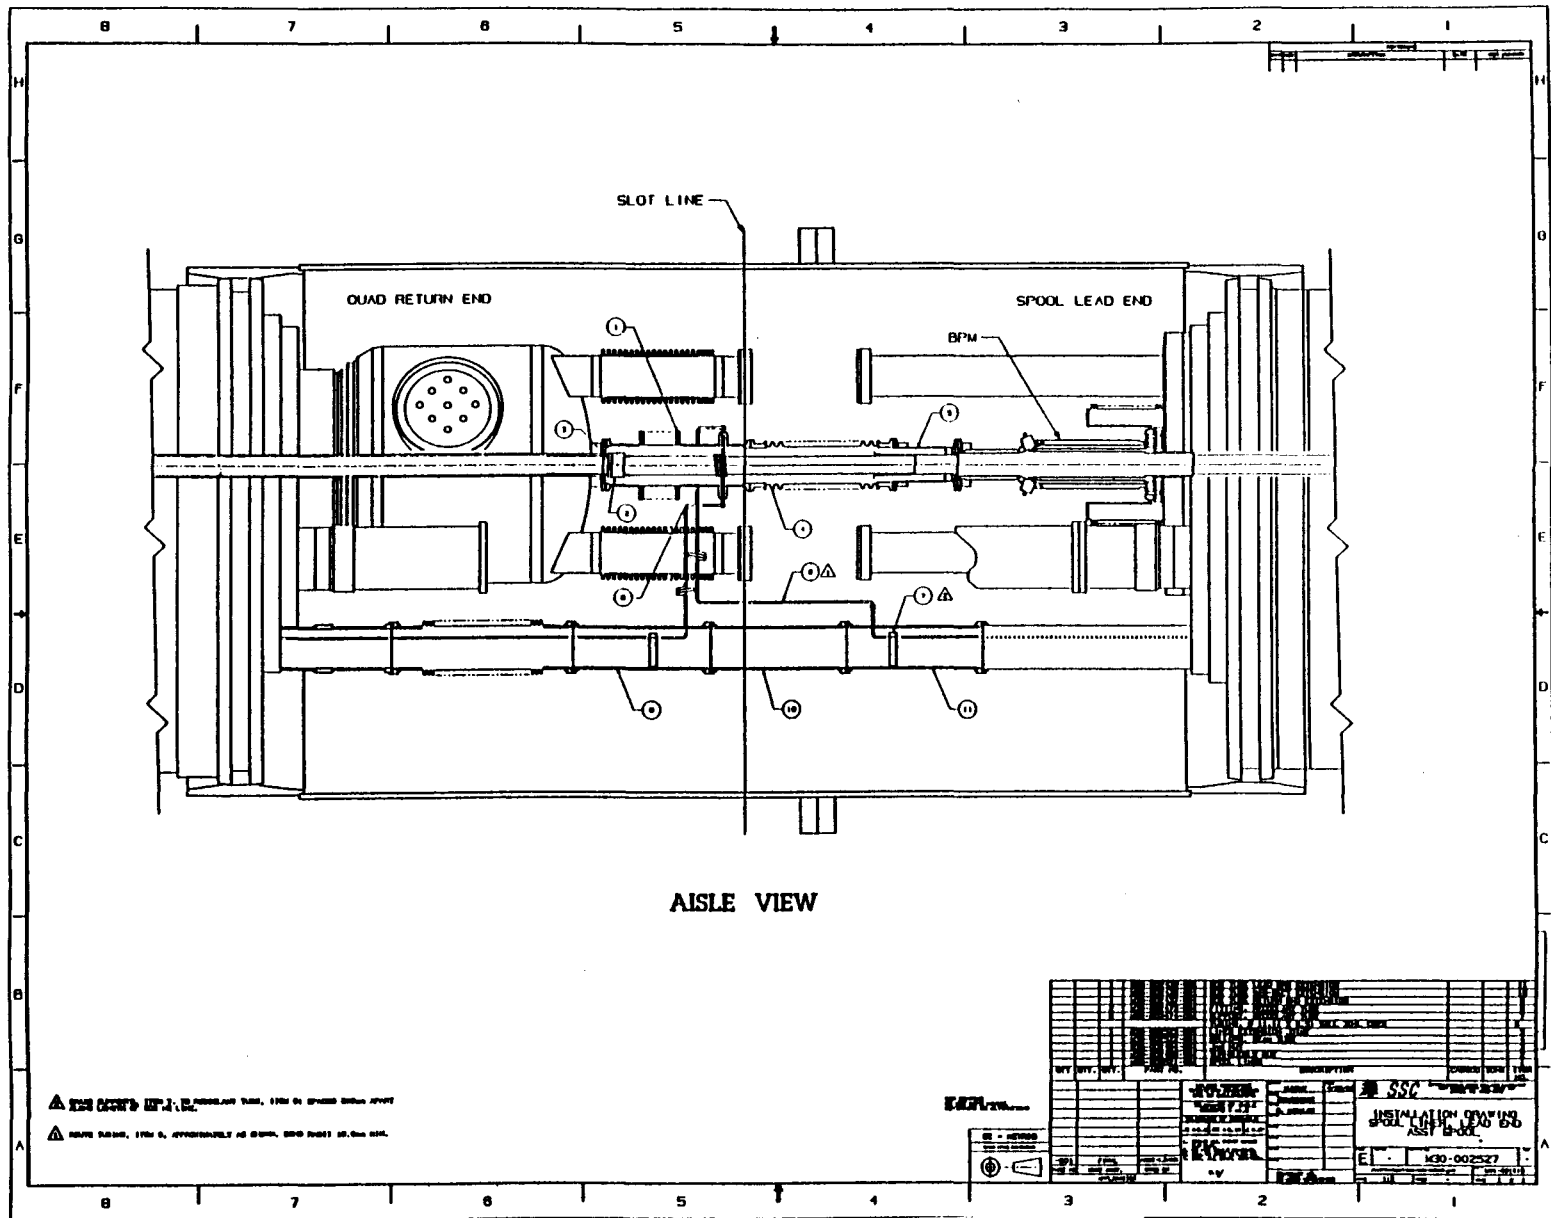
Quadrupole/Spool Liner Interconnect Assembly.
